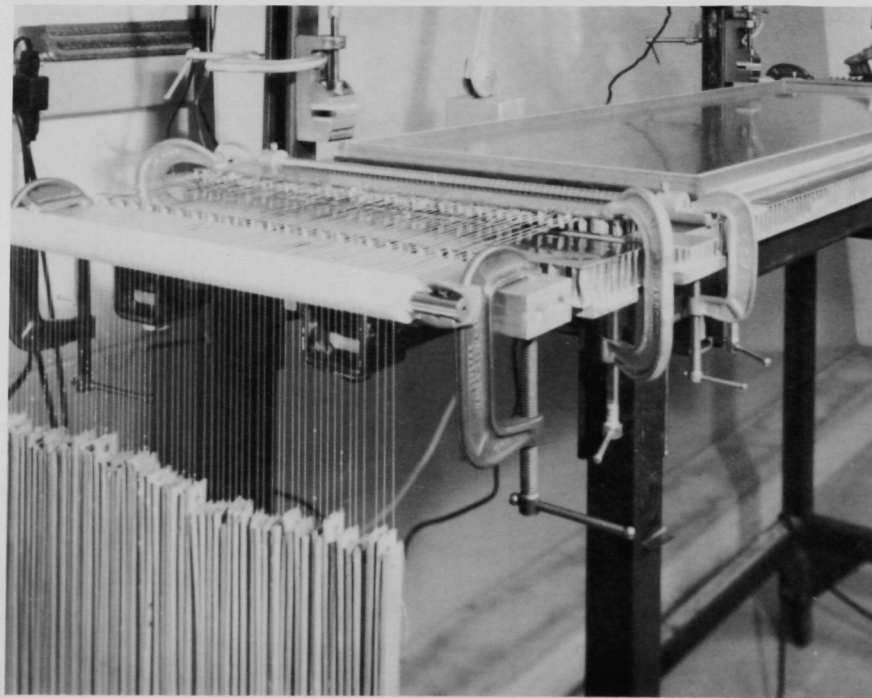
Wire stringing and tensioning for the first CDF preradiator full scale prototype.
